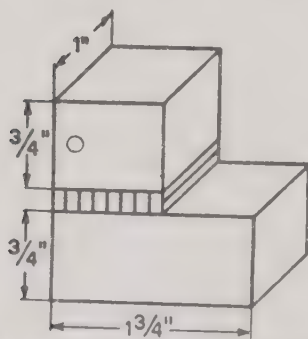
A.S.T.M. impact test specimen for wood to metal joints.
